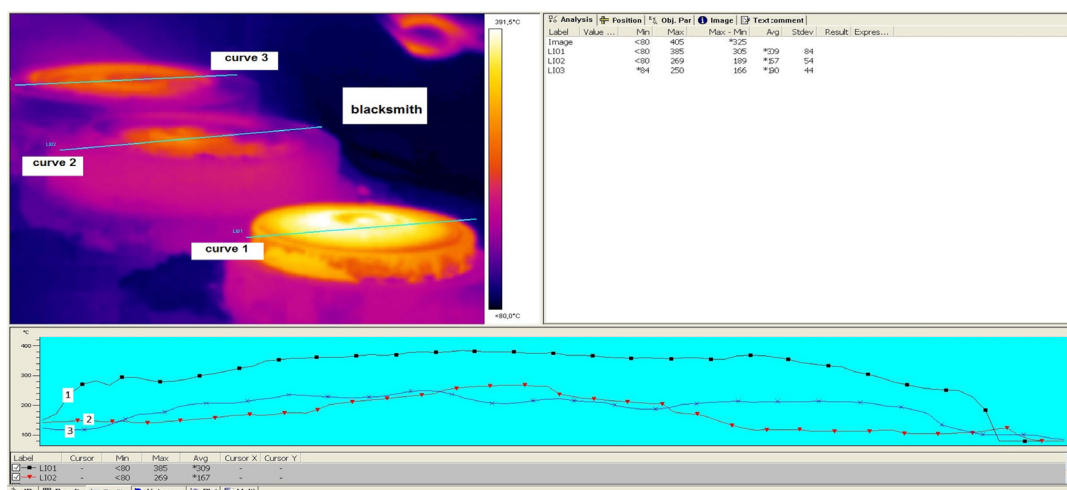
Temperature distributions of the lower die inserts used in the process of forging a wheel
